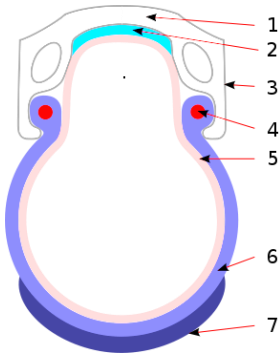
Cross-section of tyre and rim: 1: rim, 2: rim strip, 3: rim braking surface, 4: bead core, 5: inner tube, 6: casing, 7: tread. Image source: Wikipedia, Author Deerwood.
